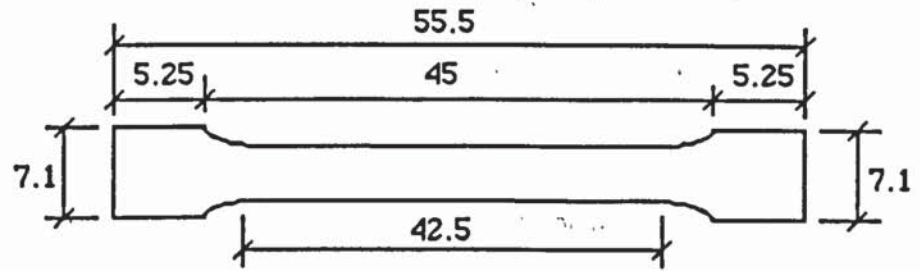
Typical longitudinal tensile parent, weld and HAZ coupons taken from 'V' butt welded specimen.
